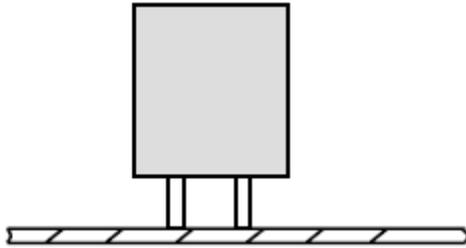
Crystal Oscillator Mounted on Circuit Board, Typical Mounting Method
